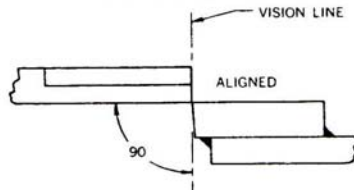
Showing how the bending leaf is adjusted properly when the edge and bottom bar edge coincide.
